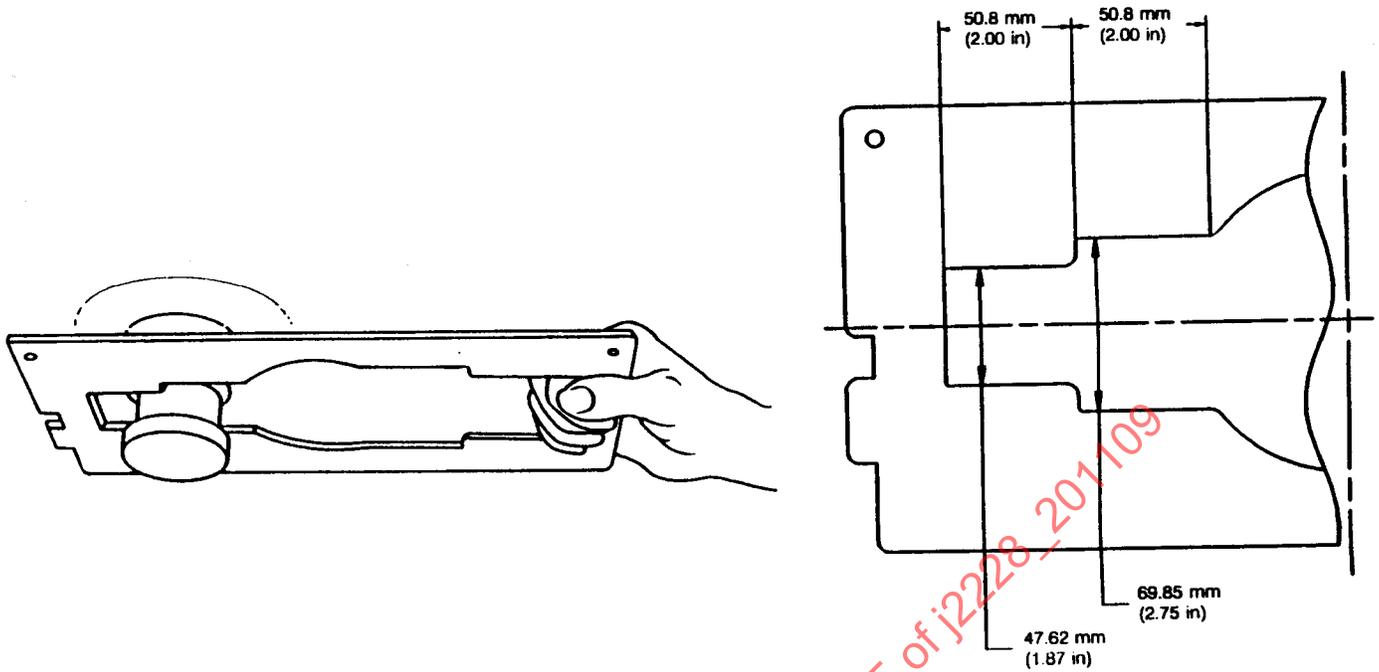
INSPECTION OF KINGPIN DIAMETERS USING ONE TYPE OF GAUGE
